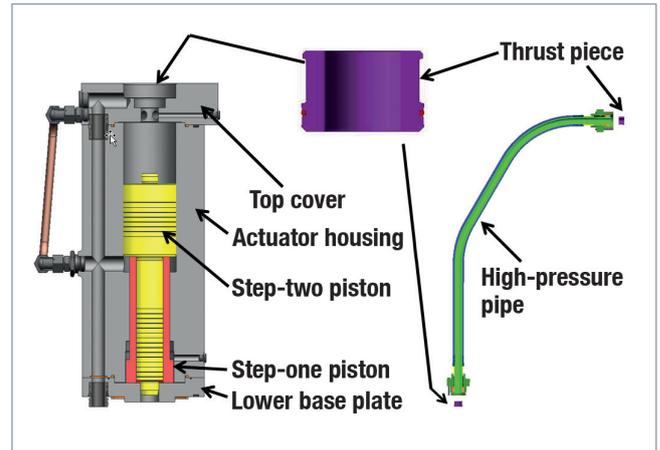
Points of interest in the exhaust valve actuator and high-pressure pipe
